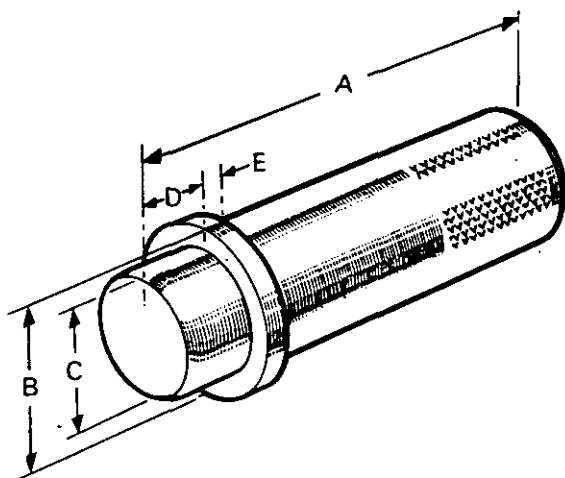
TOOL FOR REPLACING HALF-SHAFT BUSH
